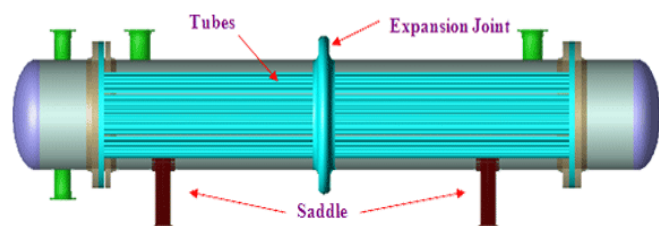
Design of a tubular heat exchanger with an expansion joint.
